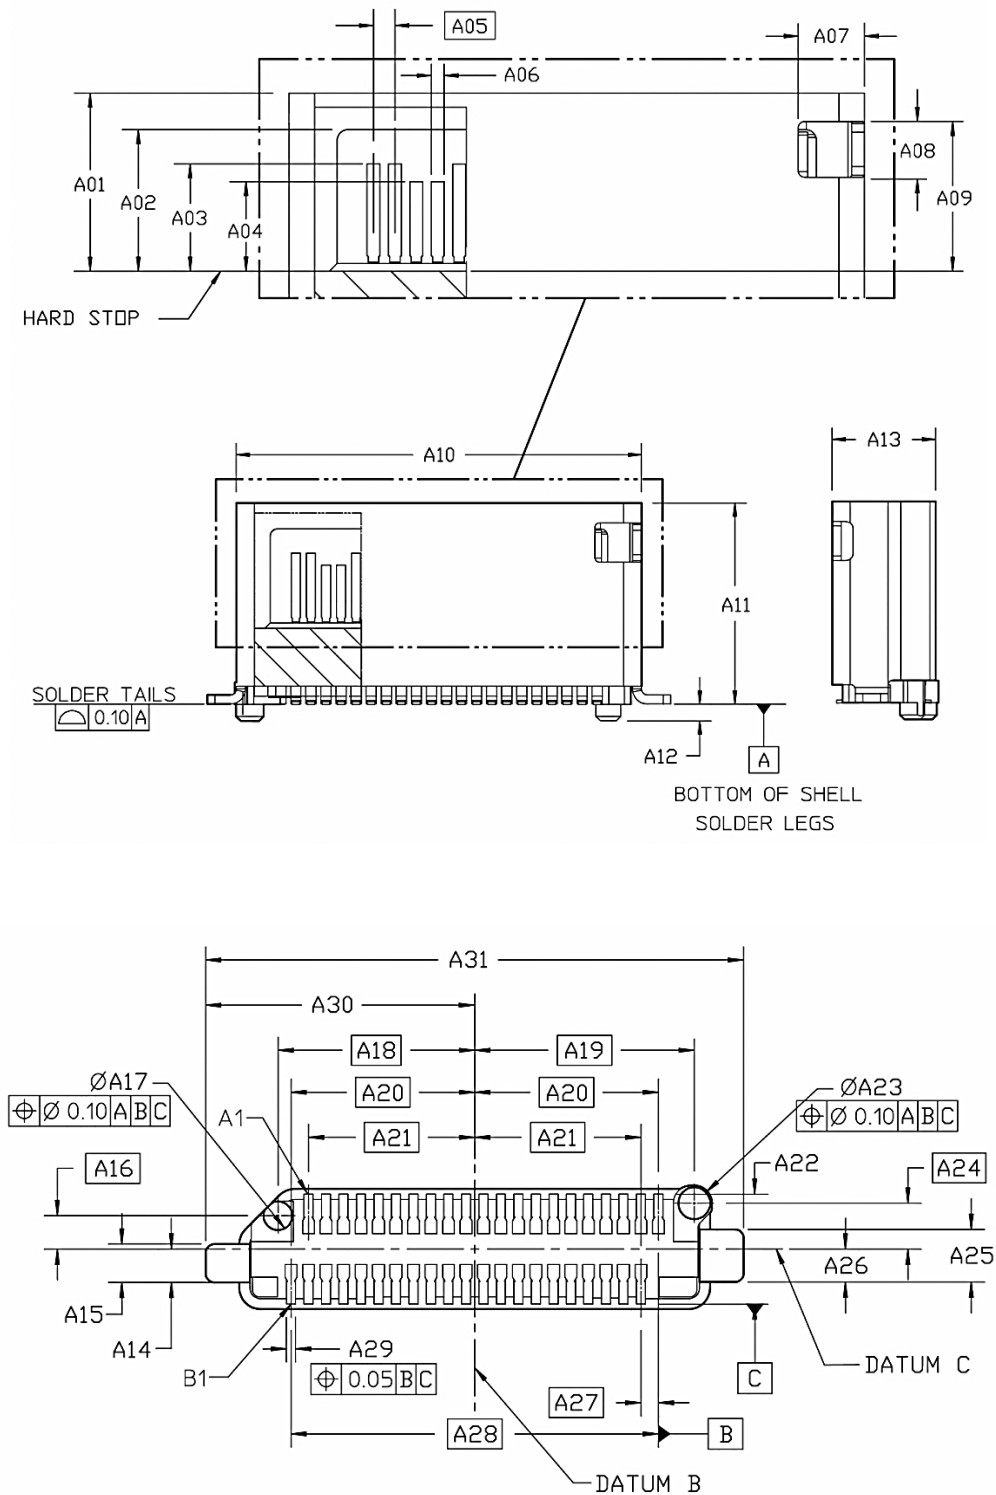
x4 Fixed Host Board-side Vertical Connector Form Factor Dimensions
